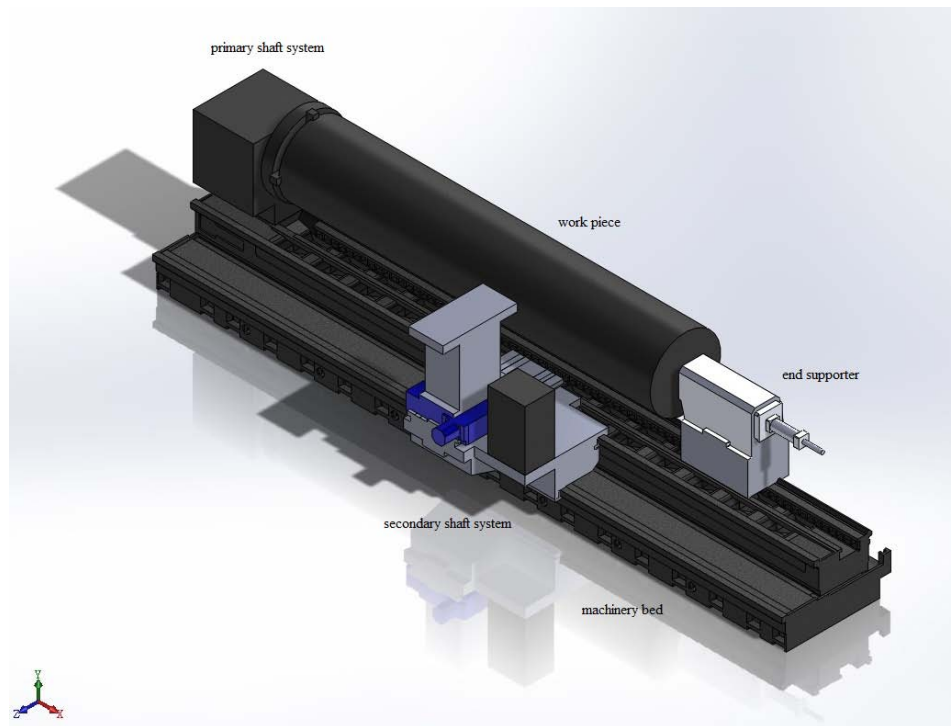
Assembling 3D parts of great five-axis turning-milling complex CNC machine
